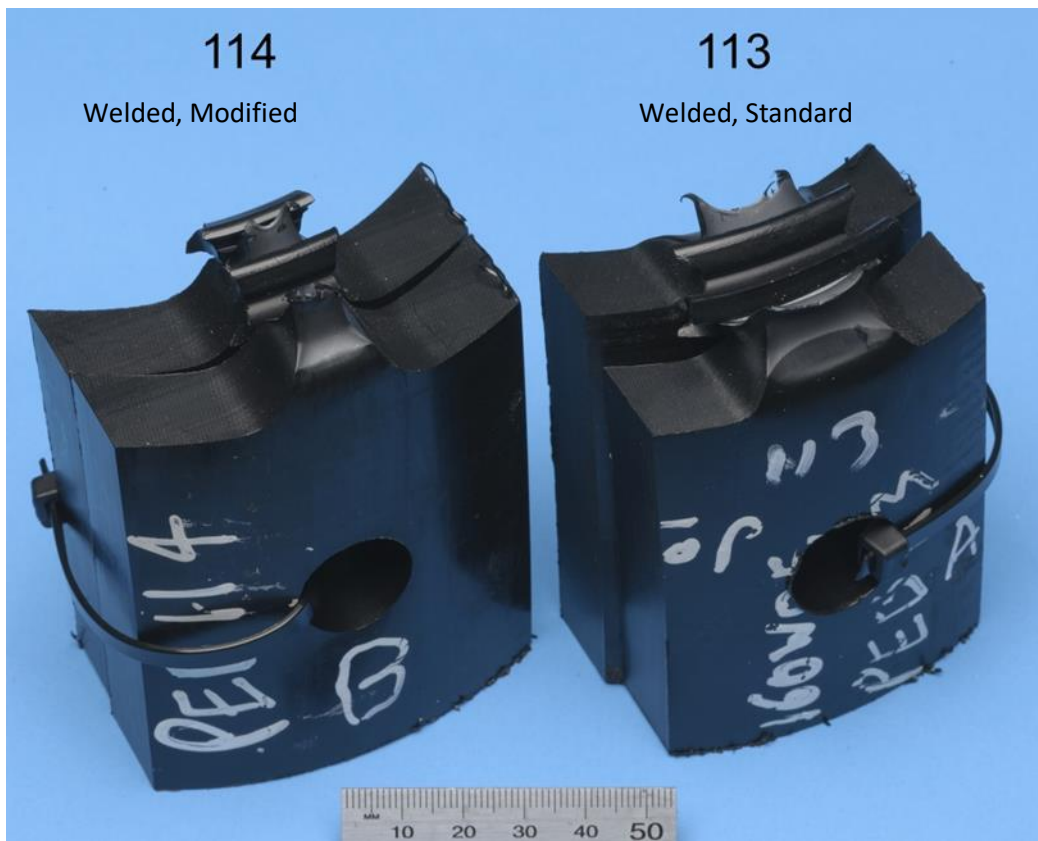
, Fracture surface of the welded modified specimen on the left and welded standard specimen geometry on the right from 160mm OD pipe
